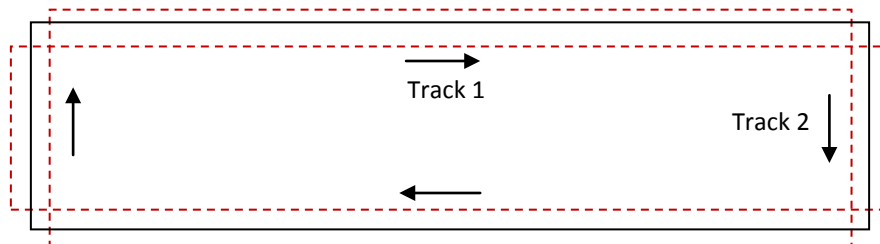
Schematic showing two tracking paths (dashed lines), where Track 1 is used to make two long welds and Track 2 is used to make two short welds. Arrows indicate where welds are made and the direction of welding. Solid line represents top view of foil assembly (not to scale).
